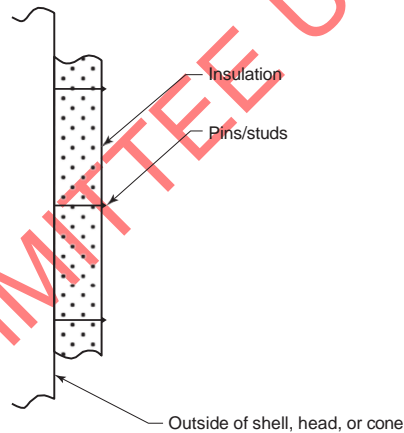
Insulation Support System with Pins/studs Welded to the Shell, Heads, and Cones
